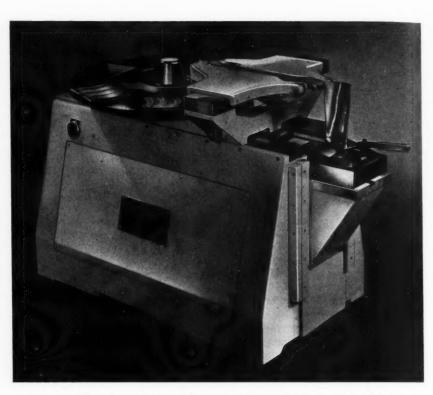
"Pant-O-Scriber" for Inspecting Turbine Blades for Jet Motors
